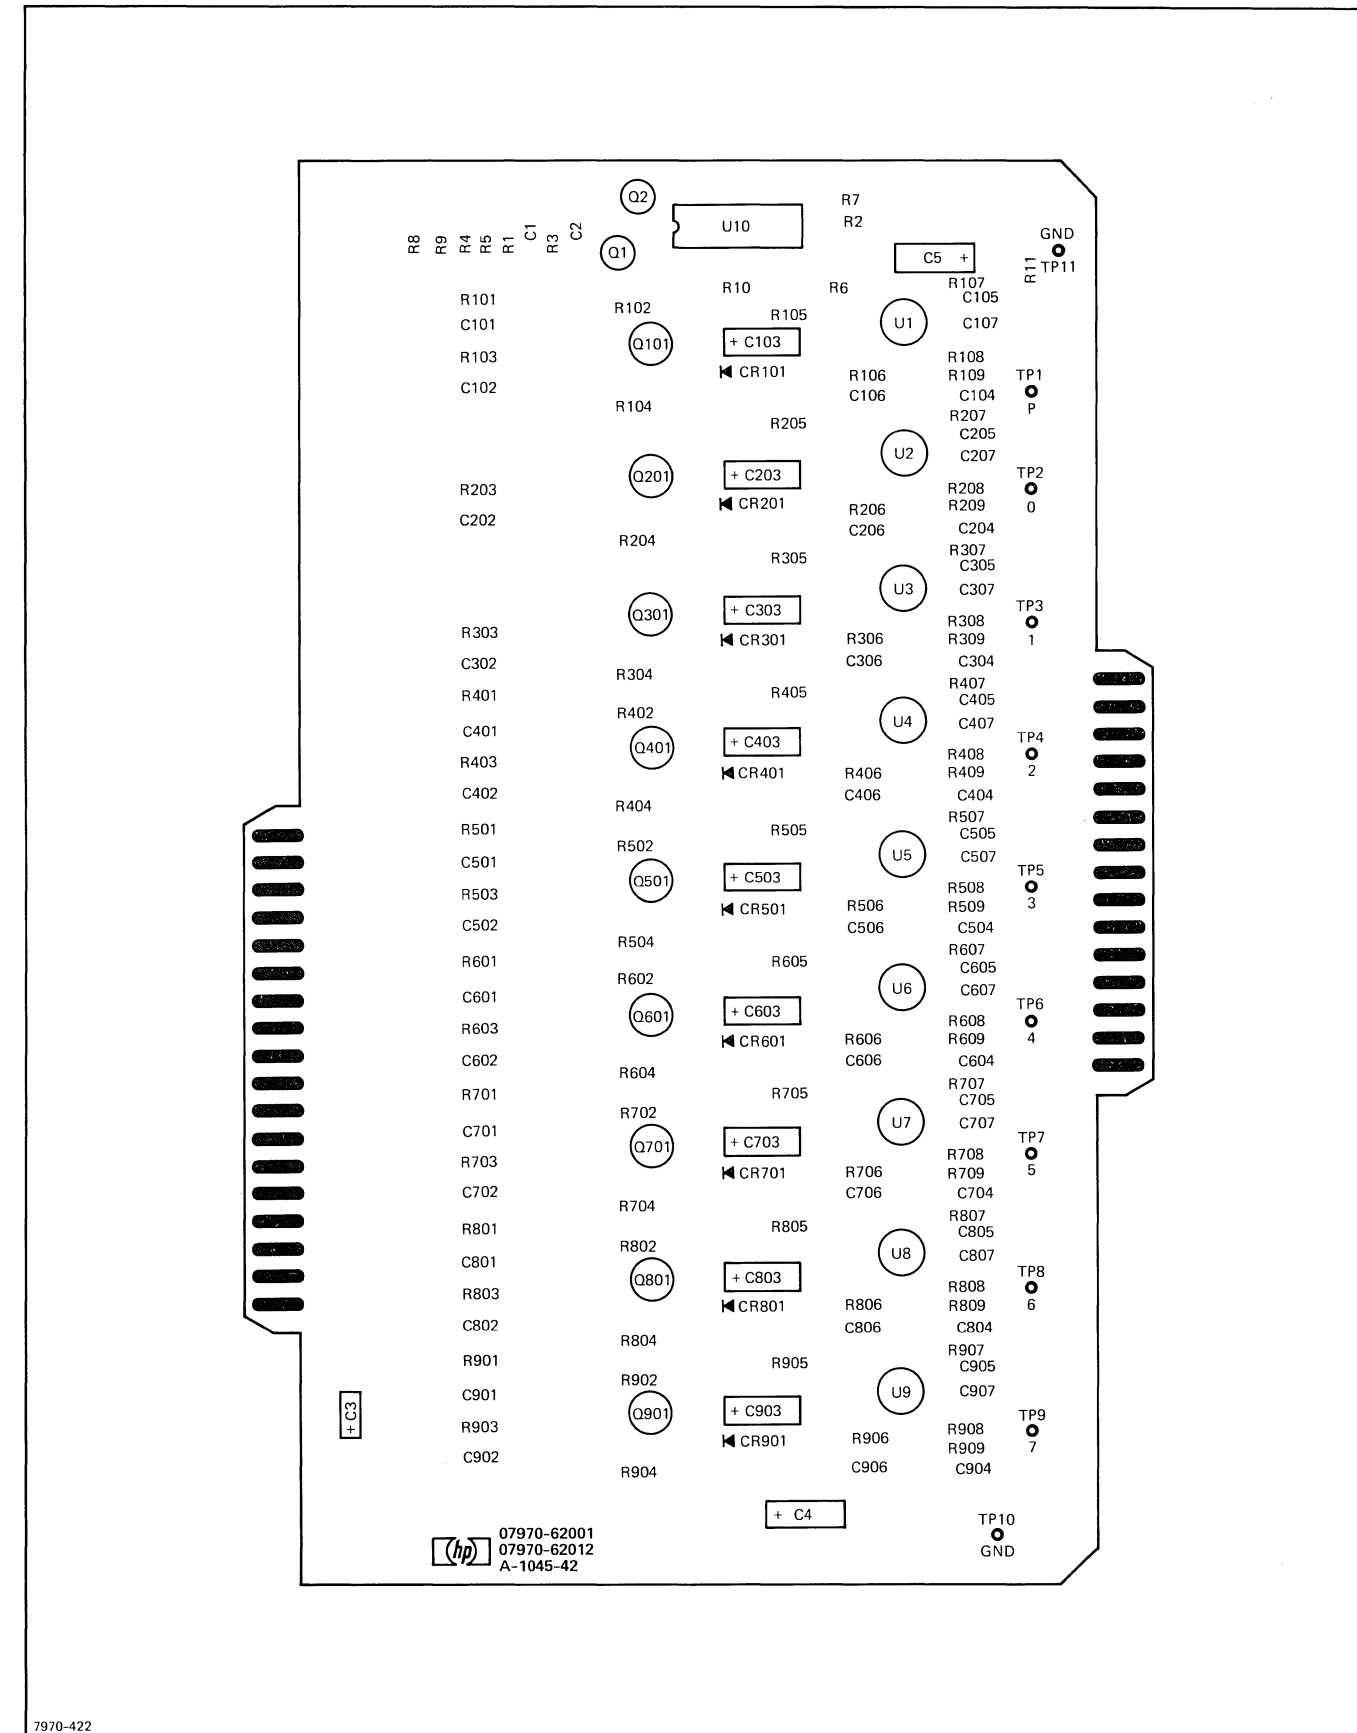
Read/Read Preampifier PC Assembly A15, Parts Location Diagram
